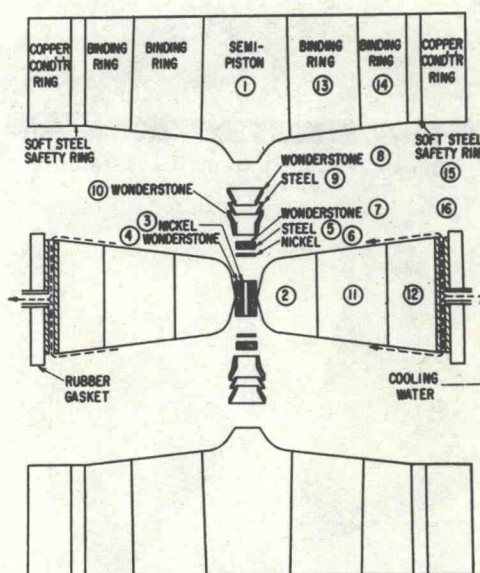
The "belt" "exploded" assembly - General Electric Company
